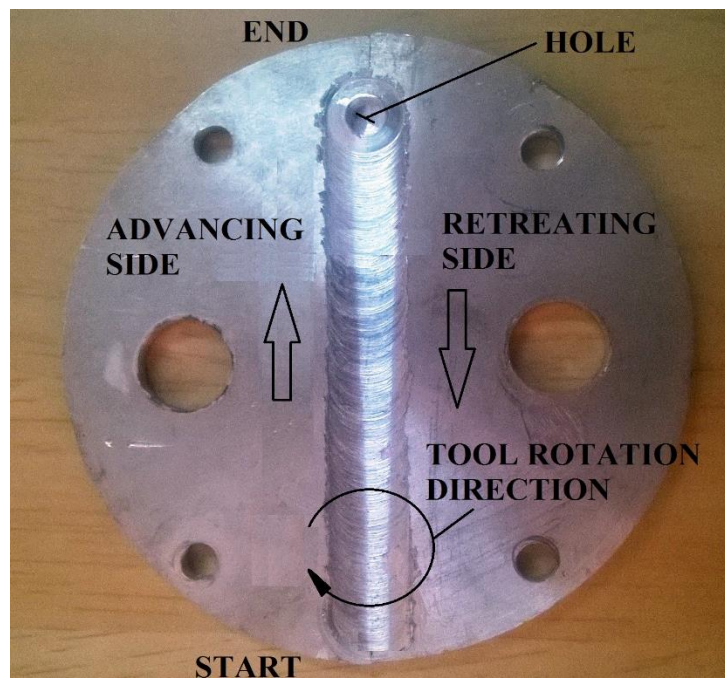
Friction stir welded Al-10Mg-8Ce-3.5Si or Al-5Mg-8Ce-3.5Si aluminium alloy specimen
